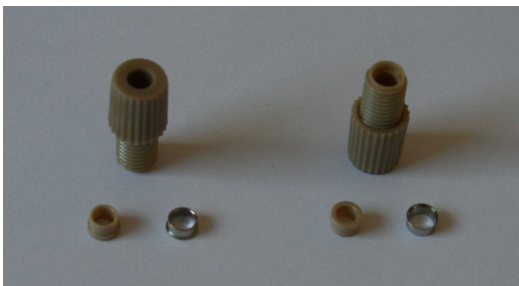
, Nut and ferrule set; left) parts viewed from above, right) parts viewed from below.
